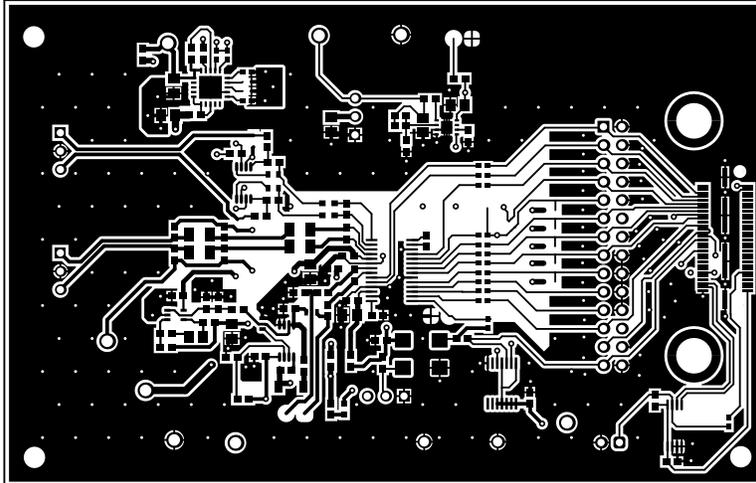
PCB Layout for the ADS1282EVM (Top Layer)
